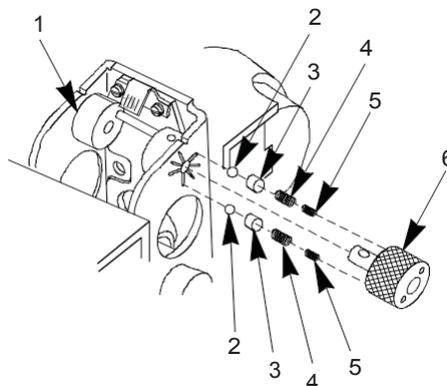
Elevation Knob Assembly, Elevator Assembly, Ball Detents, Plungers, Detent Springs
